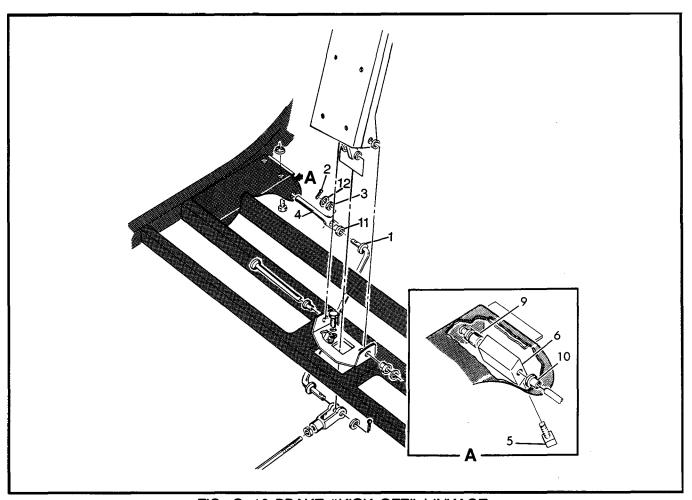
BRAKE "KICK OFF" LINKAGE
